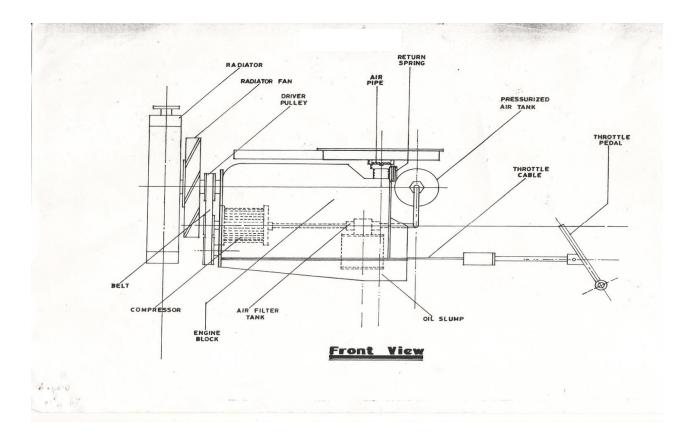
Fuel Economizer Mechanism Using Pressurized Air Pipe with pedal
